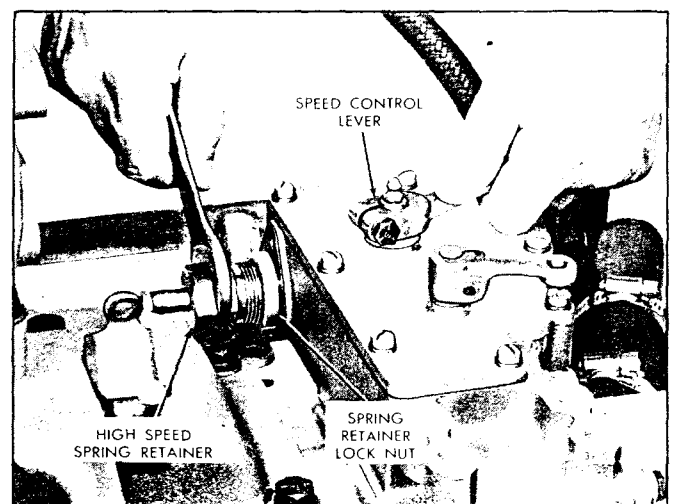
Adjusting Maximum No-Load Engine Speed
